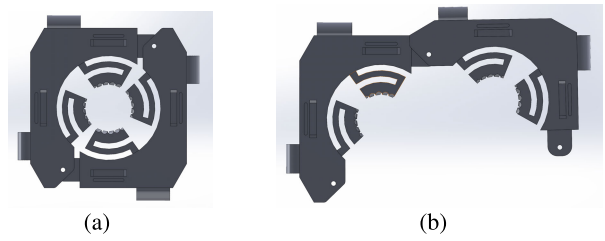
Custom 3-D-printed modular sensing fixture designed to hold and position the magnetometers at fixed distances around the conductor. (a) 3-D fixture module closed. (b) 3-D fixture module open.
